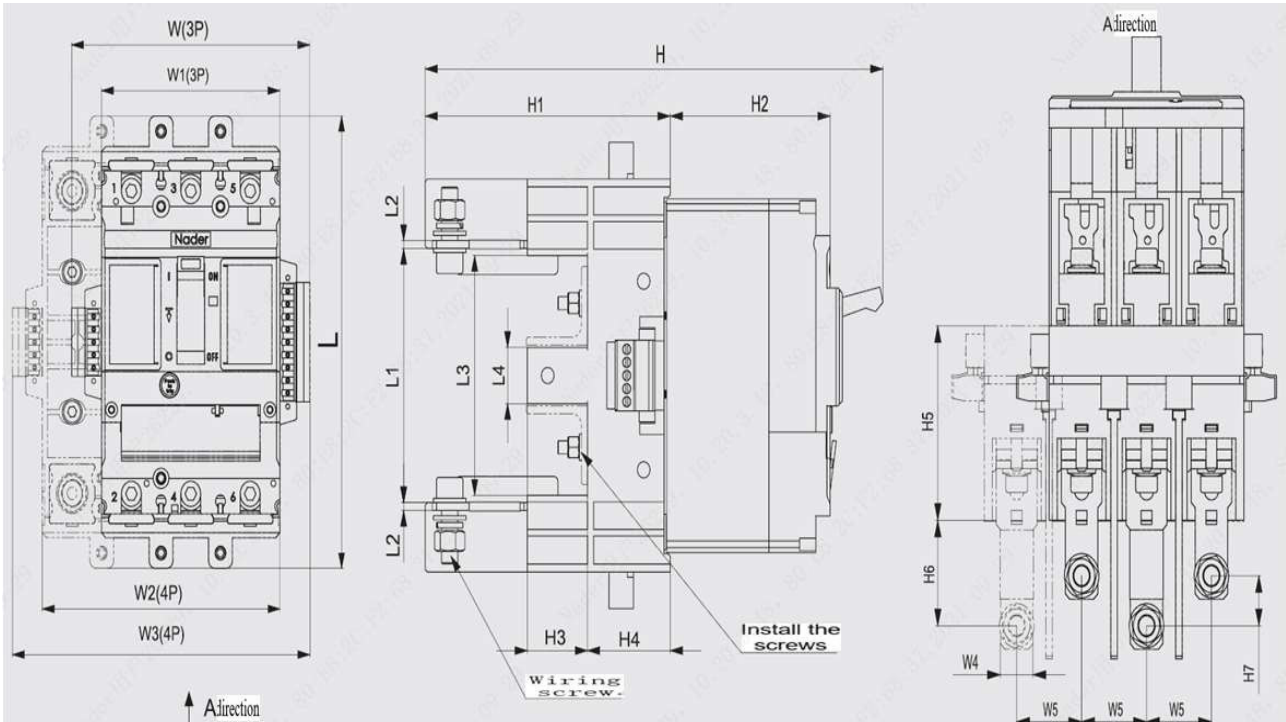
3P、4P Outline dimensions of plug-in board rear wiring products
